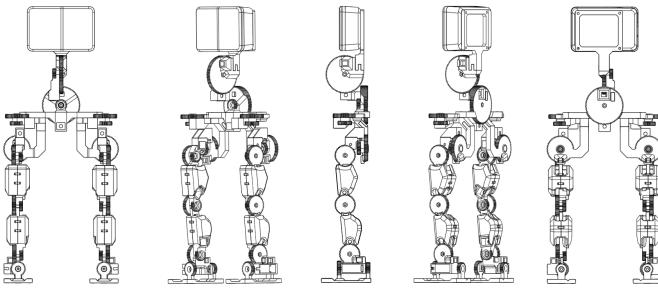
Schematic drawings of the lower part of the robot in front, side, and rear views
